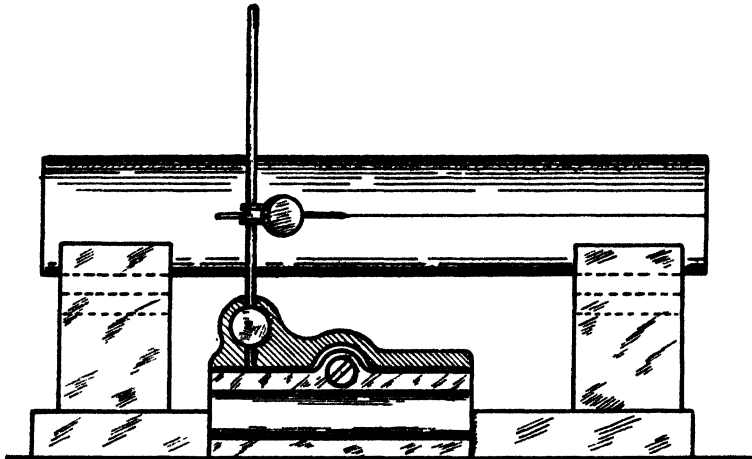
MARKING OUT A ROUND TUBE FOR THE POSITIONING OF RIVETS AT AN ANGLE OF 90° TO EACH OTHER
